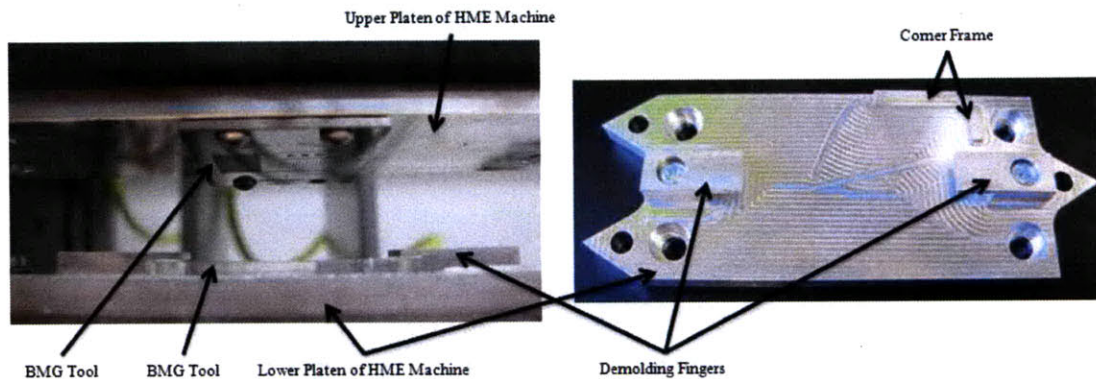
The tooling side of the HME machine showing the BMG tool, the corner frame and the demolding fingers.
